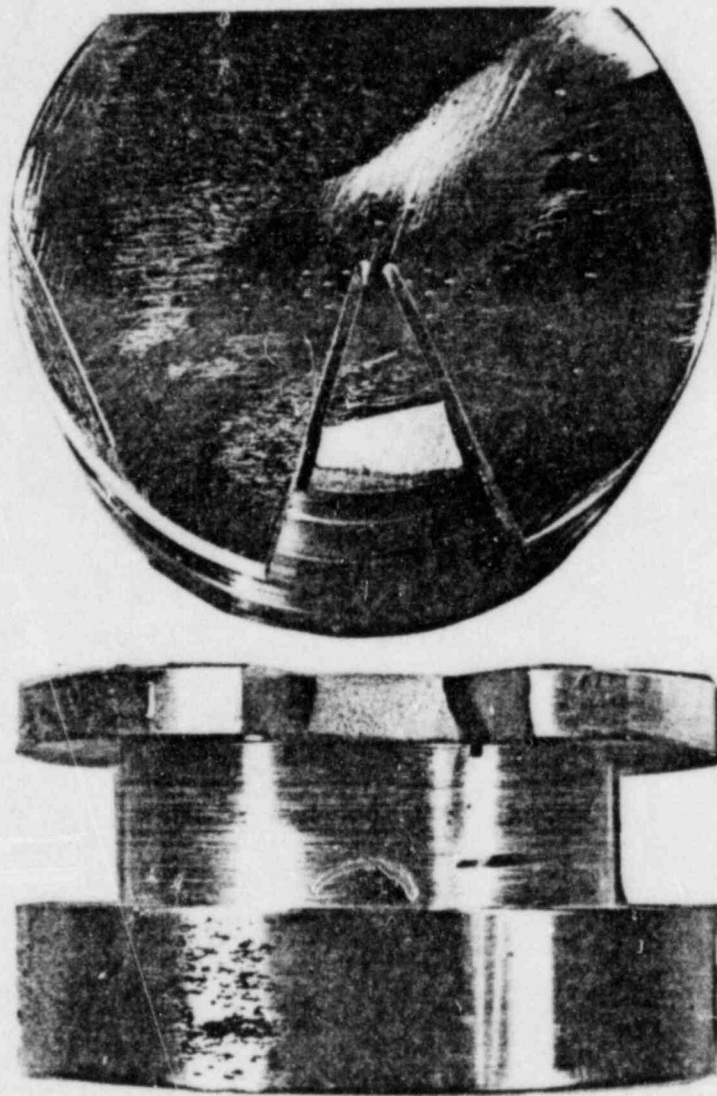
LOWER PORTION OF VALVE STEM WITH SECTION
